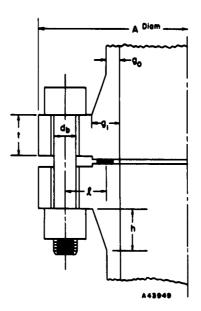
ILLUSTRATION OF INDEPENDENT DIMENSIONAL VARIABLES IN A BOLTED FITTING
